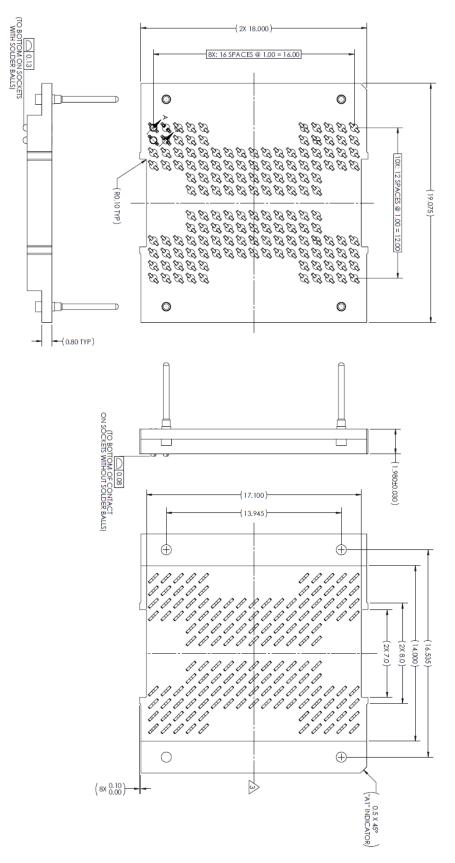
152 Ball Custom Target Socket Mechanical Dimensions (sold separately)
